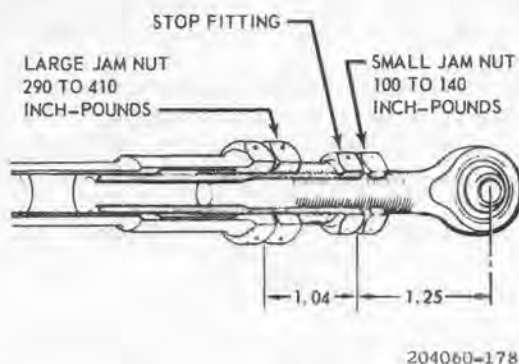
Actuator shaft dimensions — UH-1A with 87000 B4 overspeed governor
